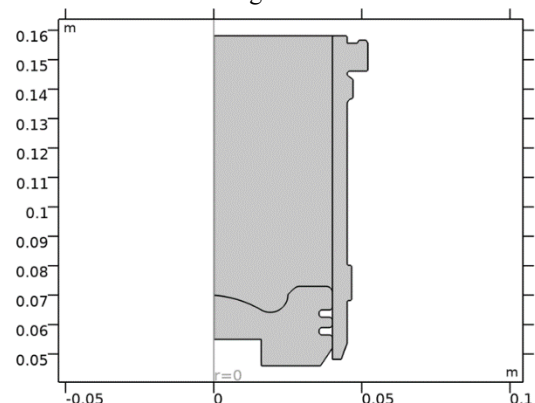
Axisymmetric view of the piston-cylinder assembly
